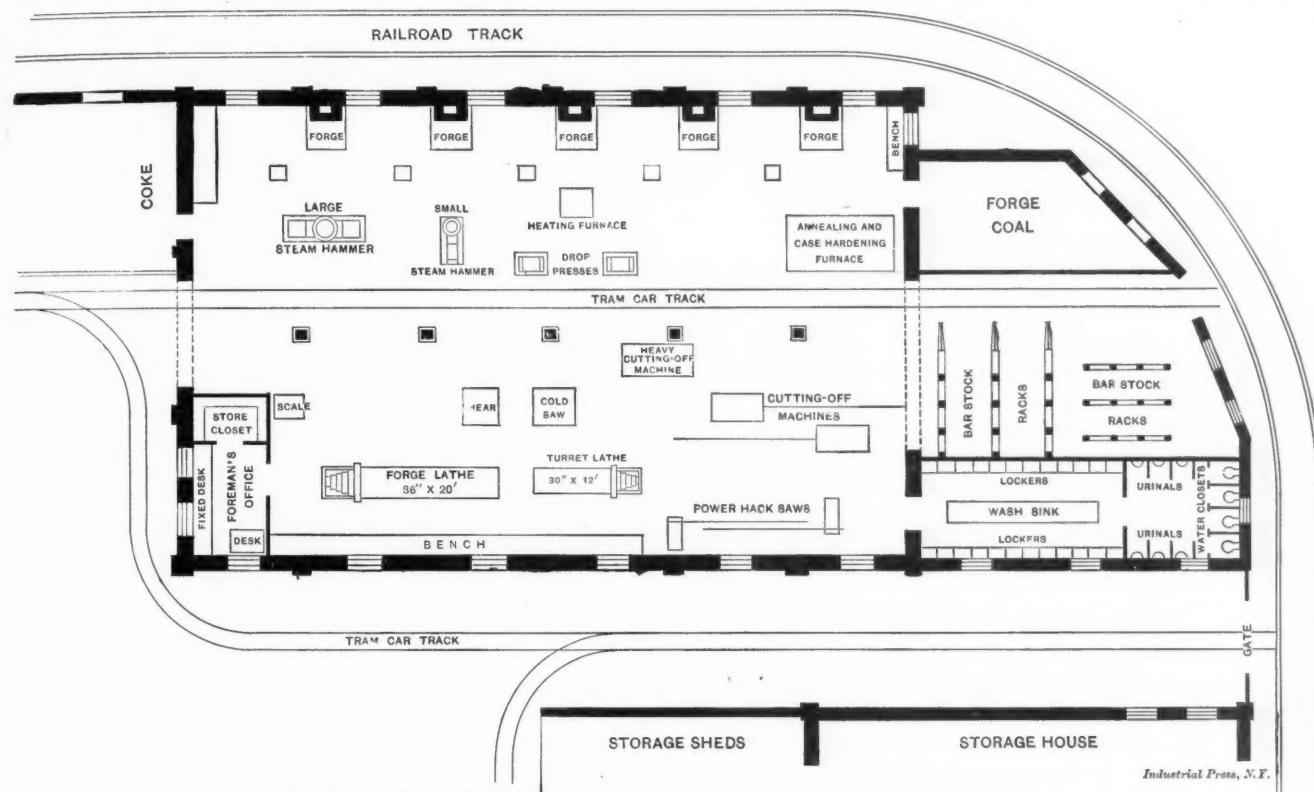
Plan View of Forge Shop, showing Proper Arrangement of the Machine Tools, etc.
